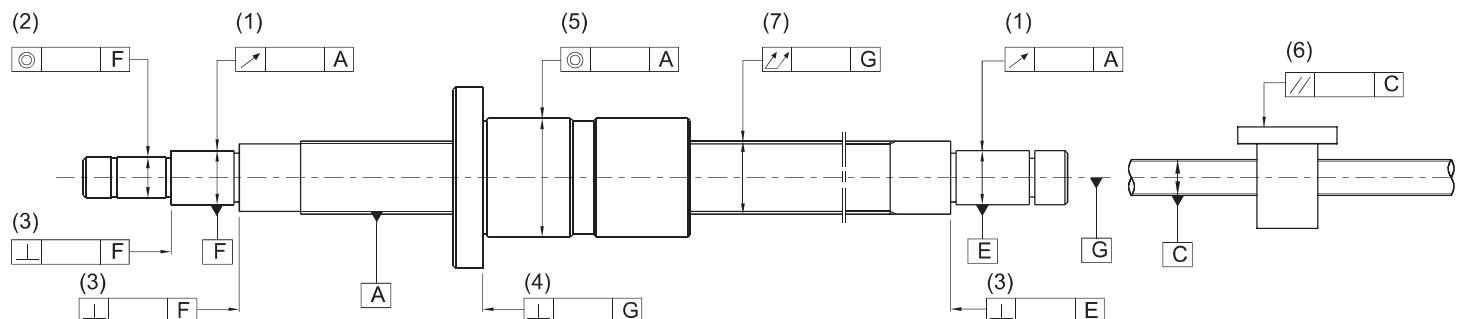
Mounting Accuracy and Tolerance
